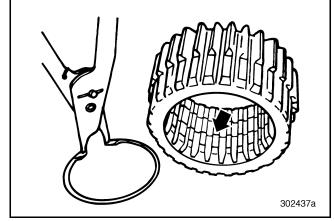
Installing Snap Ring into Gear (T313L21/T318L21 Shown)
